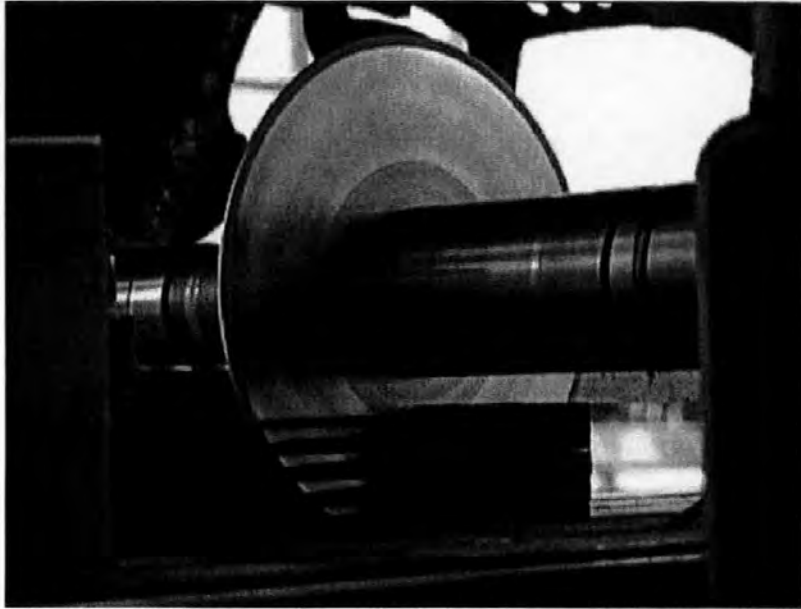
Cutting of tension / compression mechanical test coupons with Universal milling machine
